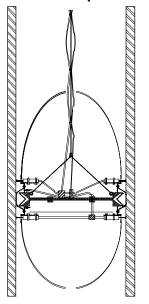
30"OD Diamond Wire Cutting Tool
